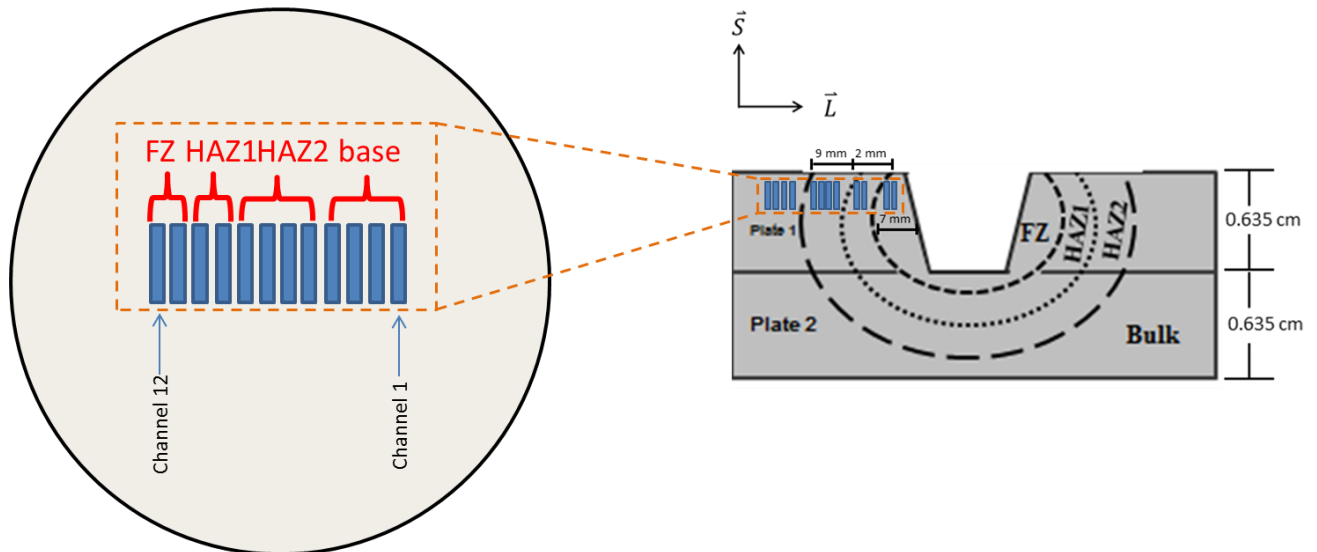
2. Dimensions of the weld zones and locations of the sections for the MMA taken from a divided weld and schematic of the multi-electrode array used to determine the current across the weld zones. The weld was divided into 12 equal sized sections, each having a surface area of 3 mm<sup>2</sup>. The number of sections was picked to represent the approximate surface area of each weld zone shown. The extracted sections were located in the MMA specimen as shown.
